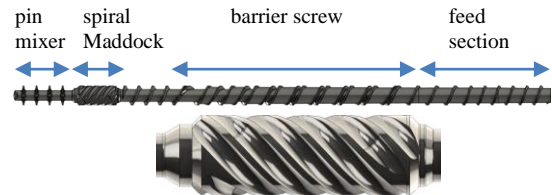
Upper: Extruder screw with four section. Fluid flow is from right to left. Lower: spiral Maddock section.
